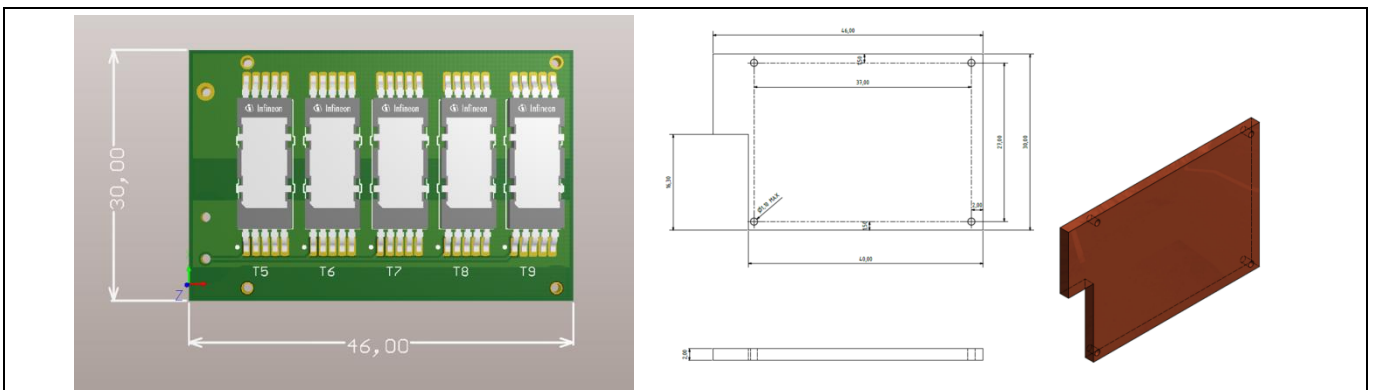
DDPAK top-side soldering evaluation board with copper plate
